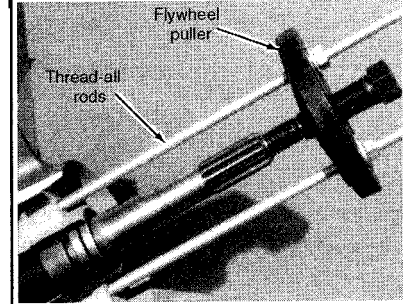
On most models, use thread-all rods and a universal puller to remove the carrier
